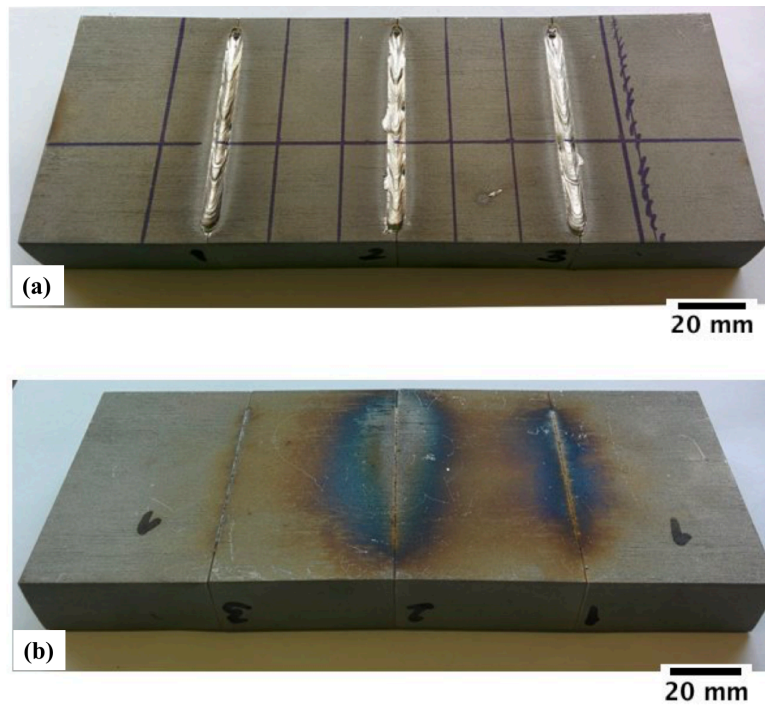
First butt joint weld. Joints 1 to 3, (a) top surface (b) bottom surface.
